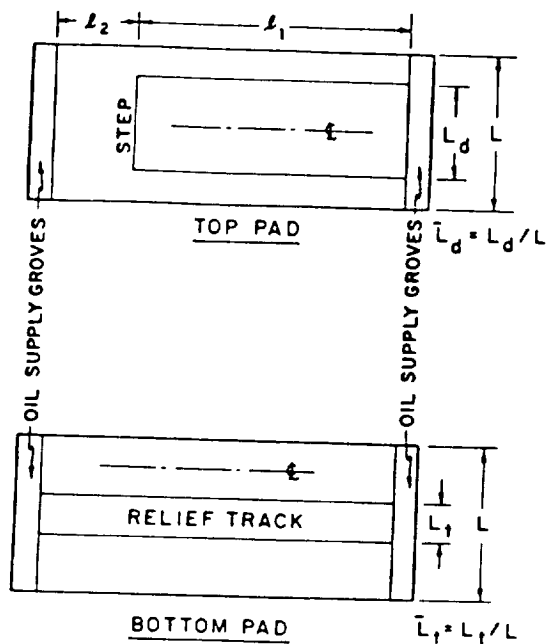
Pressure Dam Bearing Schematic, Top and Bottom Pads
